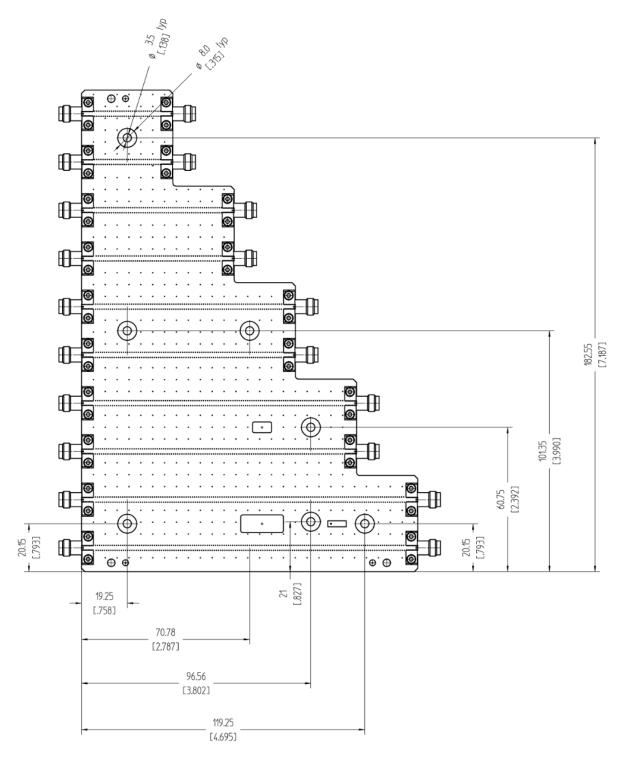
Mechanical drawing of M8049A-001 ISI channel boards with position of fastening holes.
